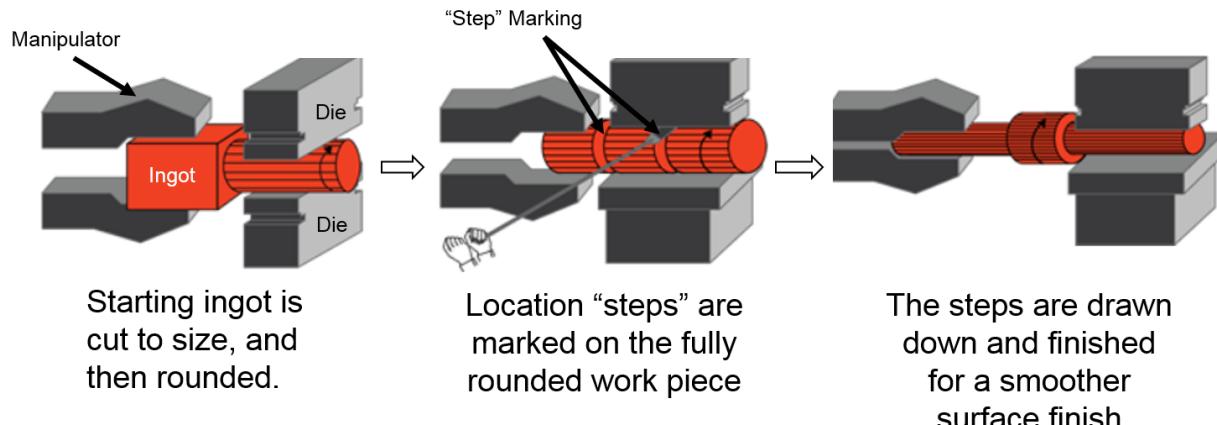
Overview of the Open Die Forging Process for Making a Spindle (Reference 6-2)
